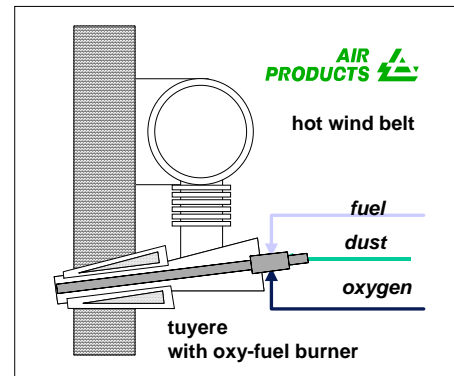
> APCOS Burner Installed in Cupola Tuyere.
